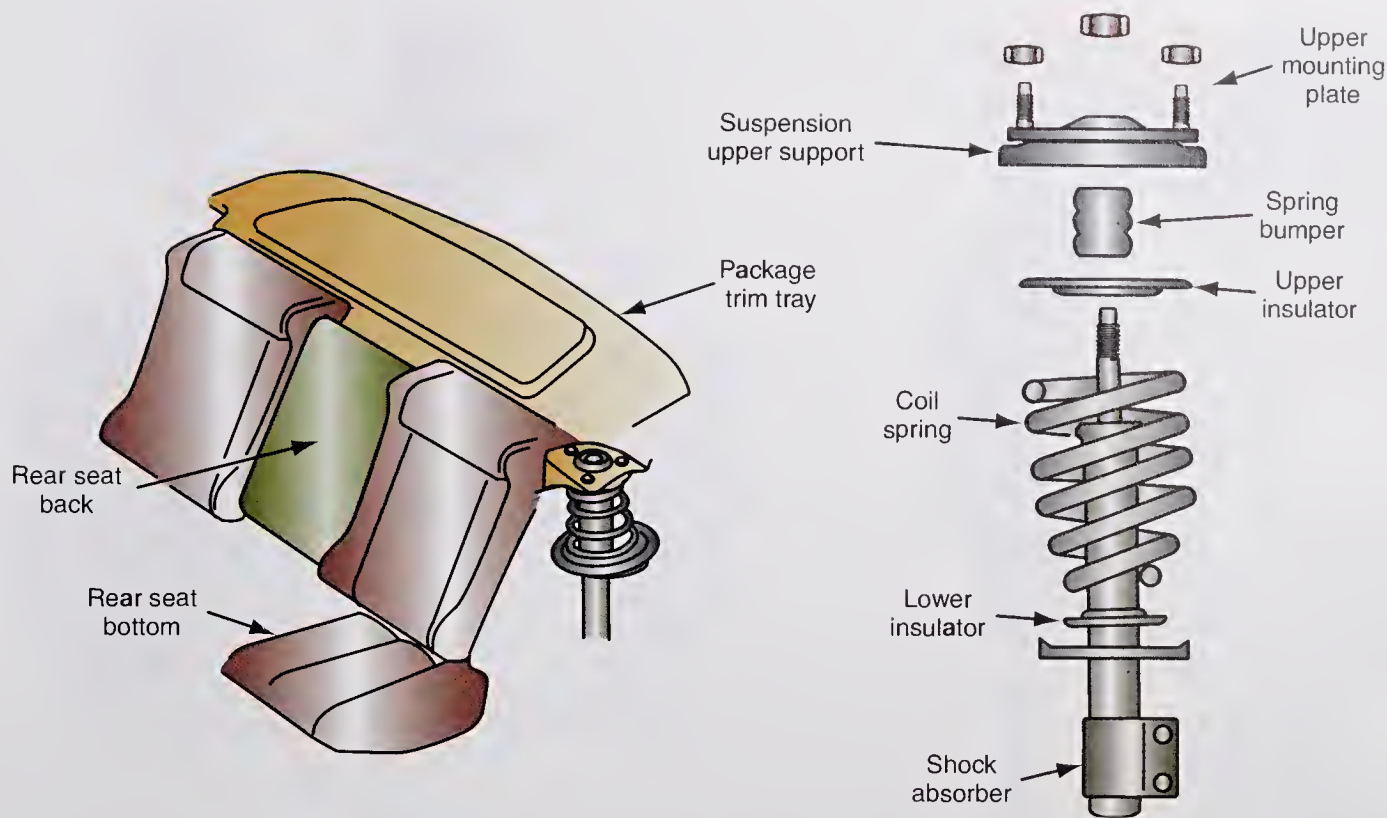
Rear suspension with rear seat and package trim tray.
